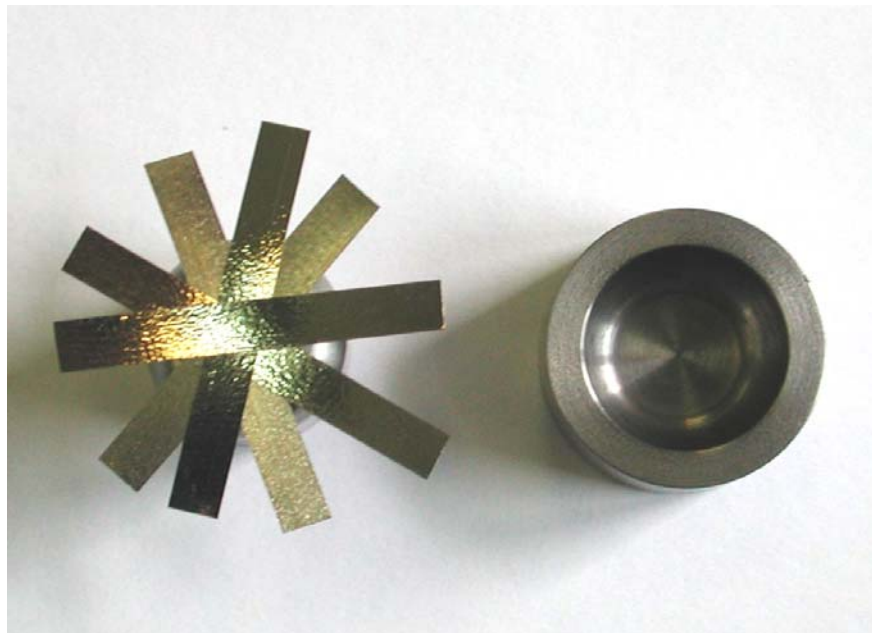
Mock-up with castellation brazed with STEMET 1311 filler metal.
